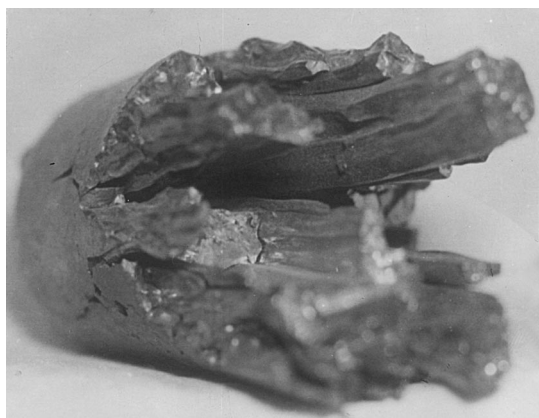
Macroscopical fracture of heat forged vanadium ingot.
